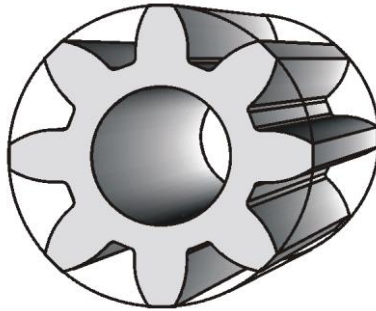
Cylindrical gear with cylindrical pitch surfaces
